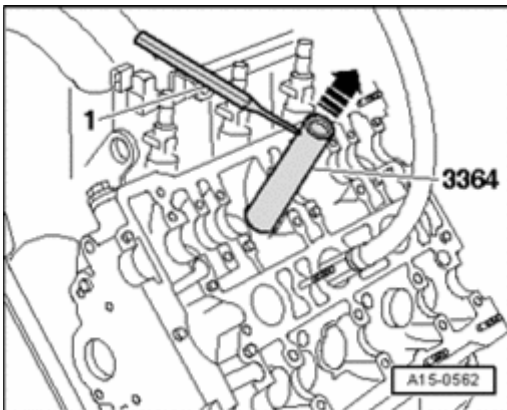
Securing Valve Seal Removal Tool 3364 With Drift Or Cotter Pin Driver
